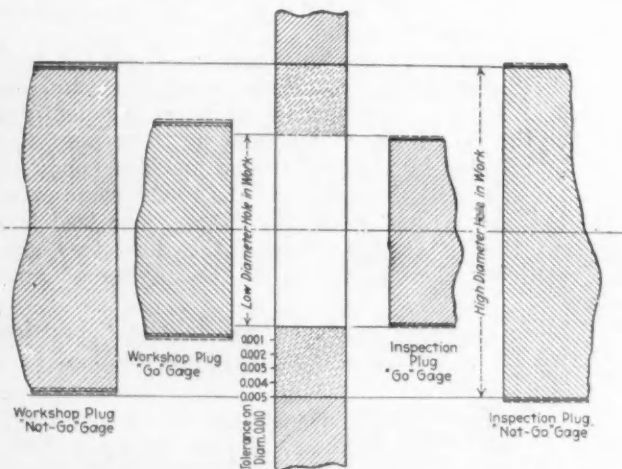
LIMITS ON FINISHED WORK AND ON INSPECTION GAGES
